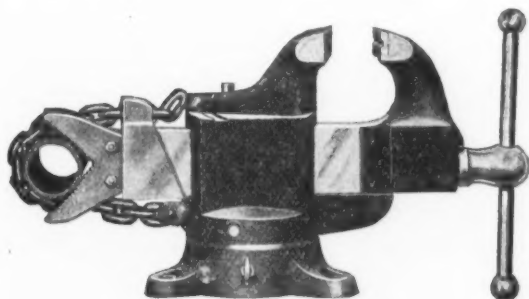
Combination Machinists' Pipe Cutter Vise.
